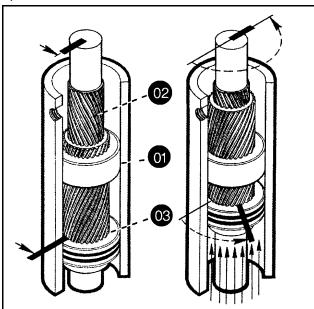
Rotator Assembly (Prior to S/N 0300067538)
